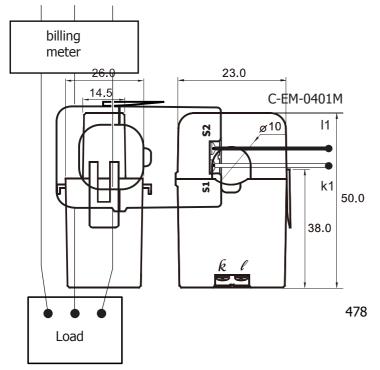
The correct direction of running the cable through the split-core current transformer, the dimensions refer to the JC10F type
